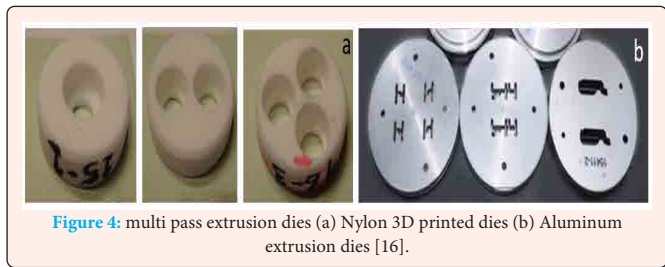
multi pass extrusion dies (a) Nylon 3D printed dies (b) Aluminum extrusion dies [16].
